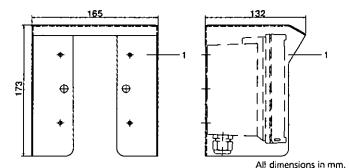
51205989-001 protective hood for wall and pipe mounting
